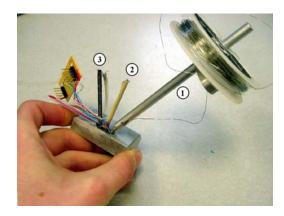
Demonstrating custom coil winding tool: 1) coil winding tool 2) High temperature insulation tape 3) Completed coil
